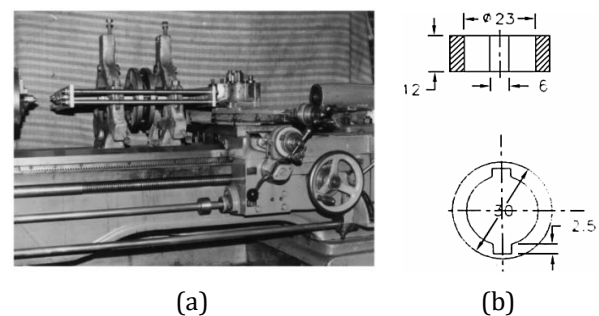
(a) The setup is mounted on an LB-17 HMT lathe and (b) workpiece [7].
